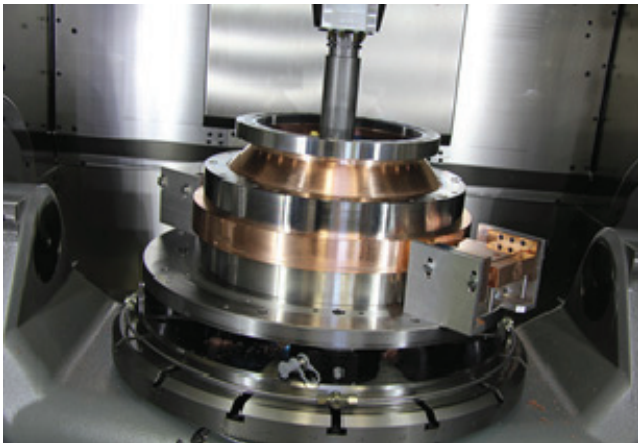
Pulse compressor BOC mounted in a zero-point clamping system on the swivelling rotary table of the CNC machining center Hermle C42 U MT.
